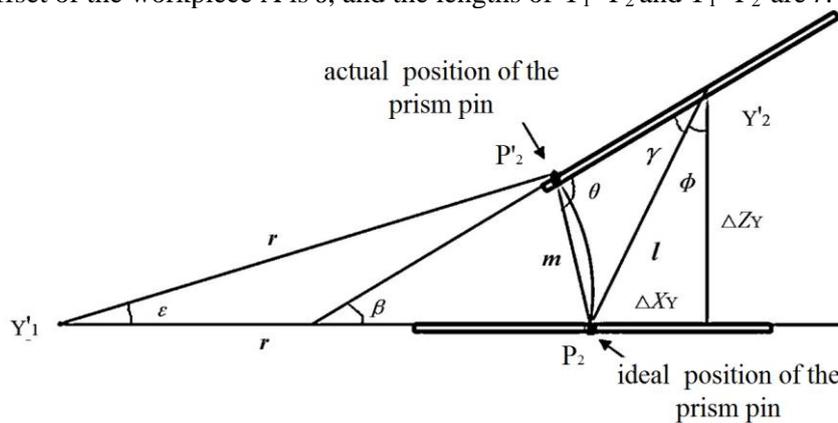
locating error of workpiece A caused by the fabricating error of fitting groove Y_2
